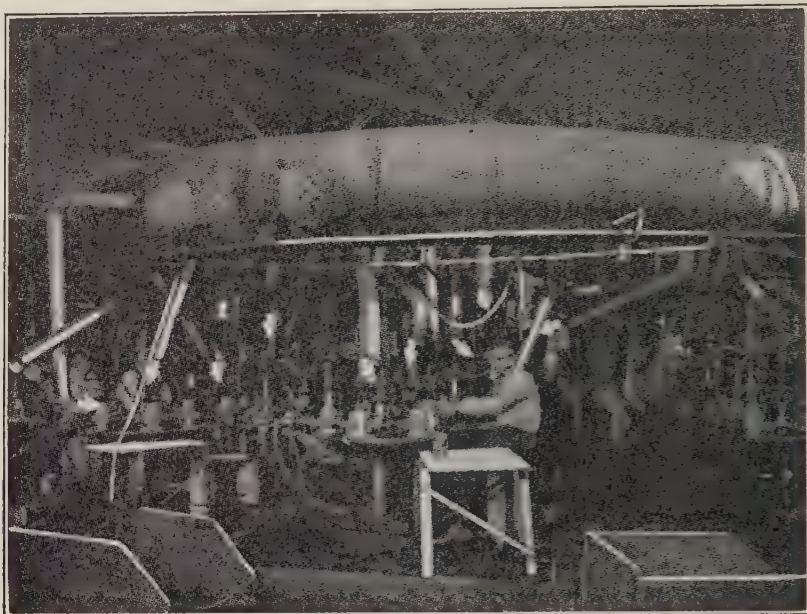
Blower System for the Removal of Dust and Shavings from a Woodworking Machine
